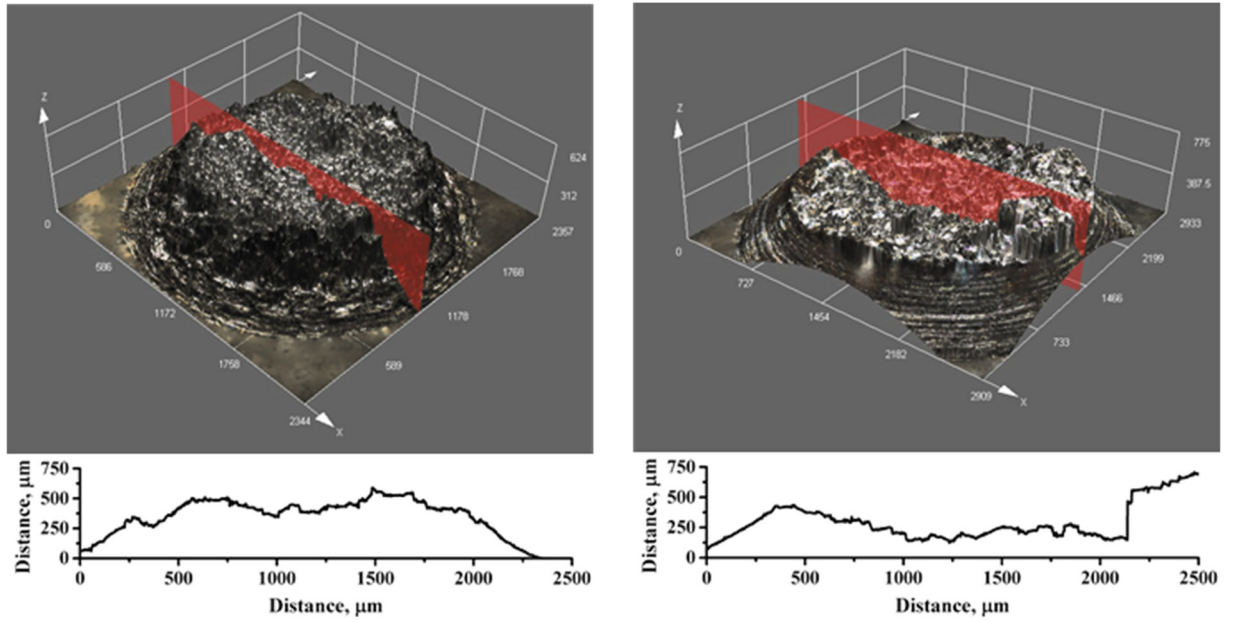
CLSM 3D isometric images of the fracture surfaces with cross-section profiles for the specimens tensile tested at 200 °C (a) and -196 °C.
